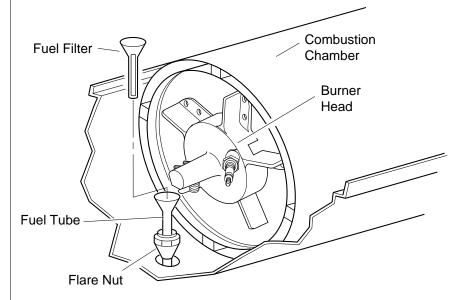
Fuel Filter Removal, 44 kW (150,000 BTU/Hr) Model
